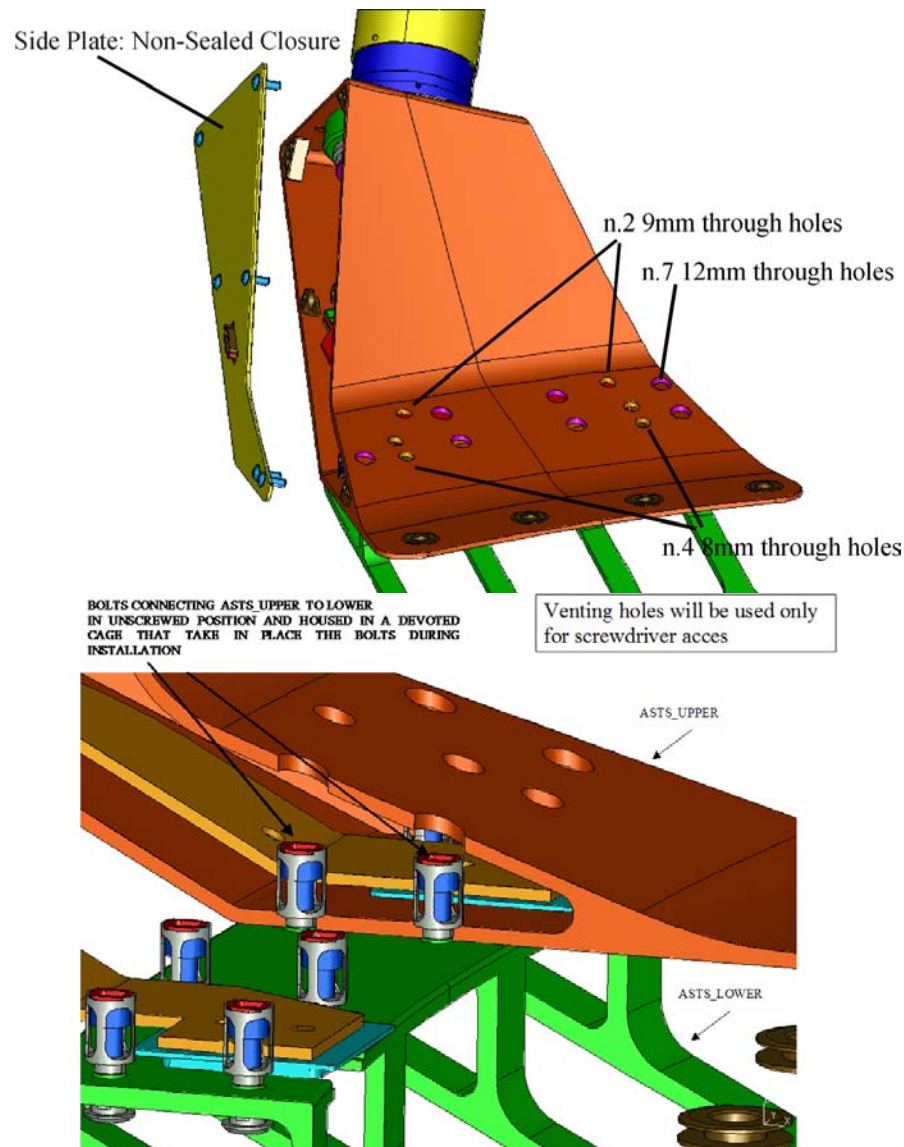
Star Tracker Assembly and Venting Paths
